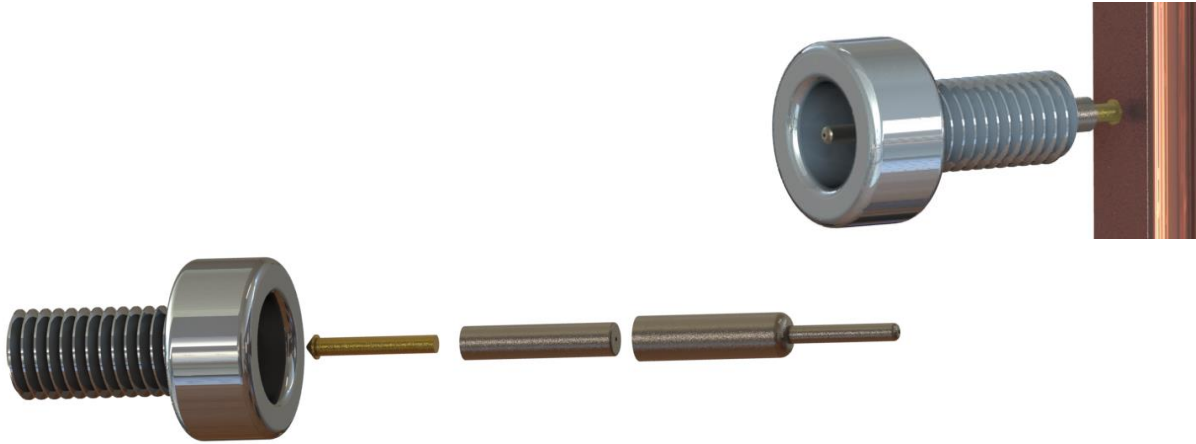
Exploded and assembled render of the spring loaded voltage contact design
